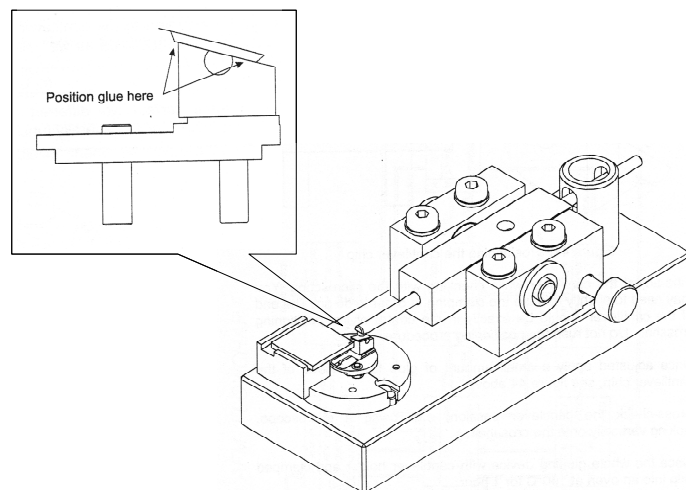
OMICRON attaching device and positioning the cantilever chip.
